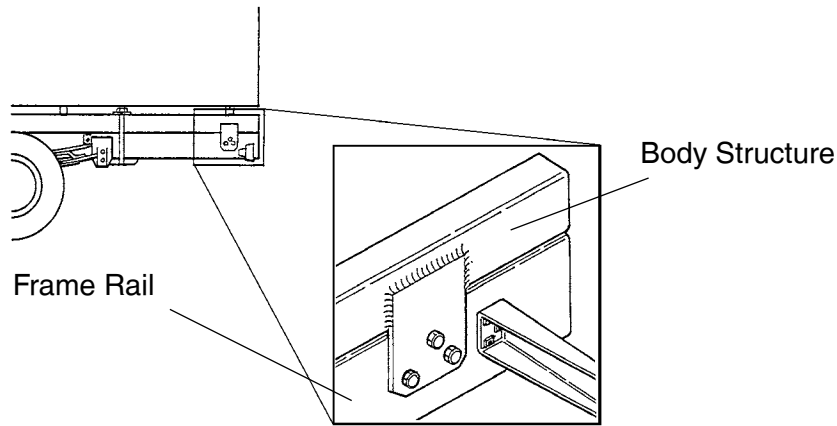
Example of Fishplate Bracket at Rear End of Body, used with U-Bolts
